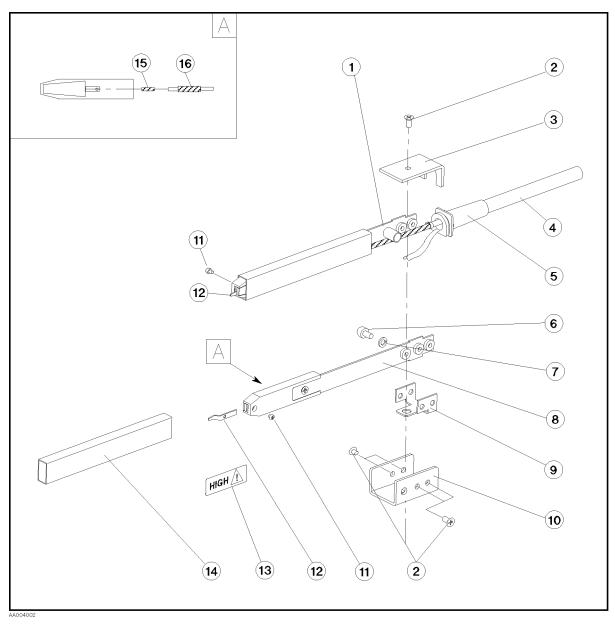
Replaceable Mechanical Parts Identifier (1 of 2)
